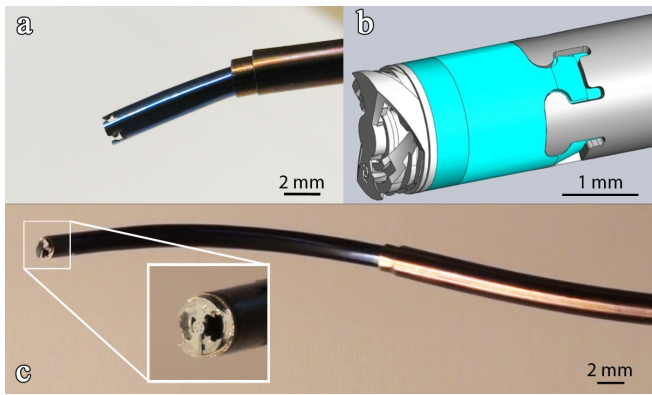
Snap-in mounting system to connect tissue removal tool to the distal NiTi robot tube. (a) Robot showing laser cut dog ear pattern. (b) CAD model showing assembled tool and robot. (c) Actual assembly.
